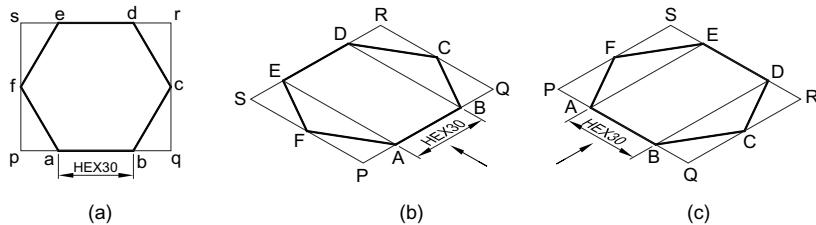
Hexagon (a) Orthographic view (b) and (c) Isometric views
